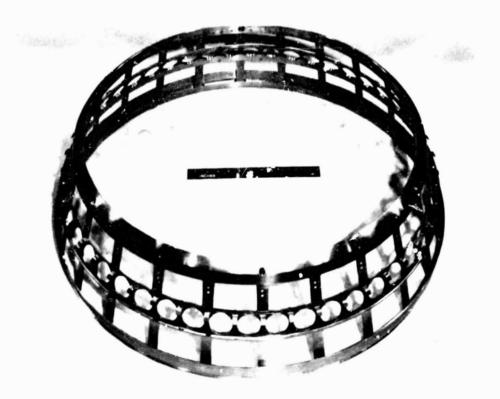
Combustor Component Outer Combustor Advanced Liner Support Frame
